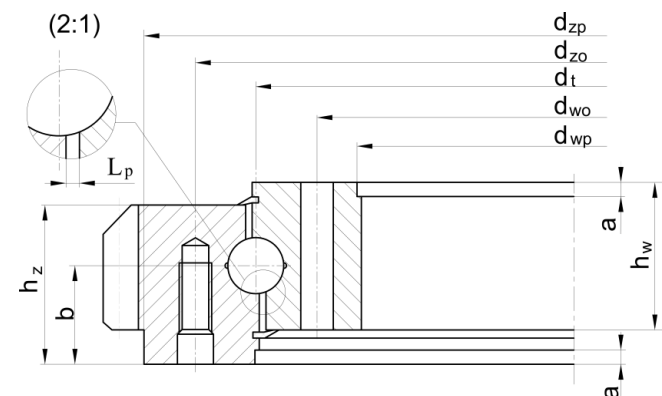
Basic geometric parameters of the single-row ball slewing bearing
